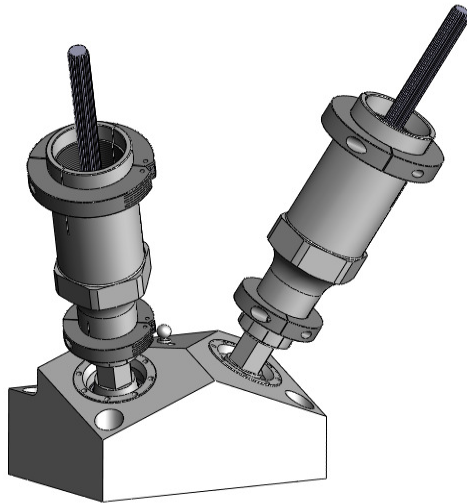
The completed lower bi-pod assembly is shown [24].
